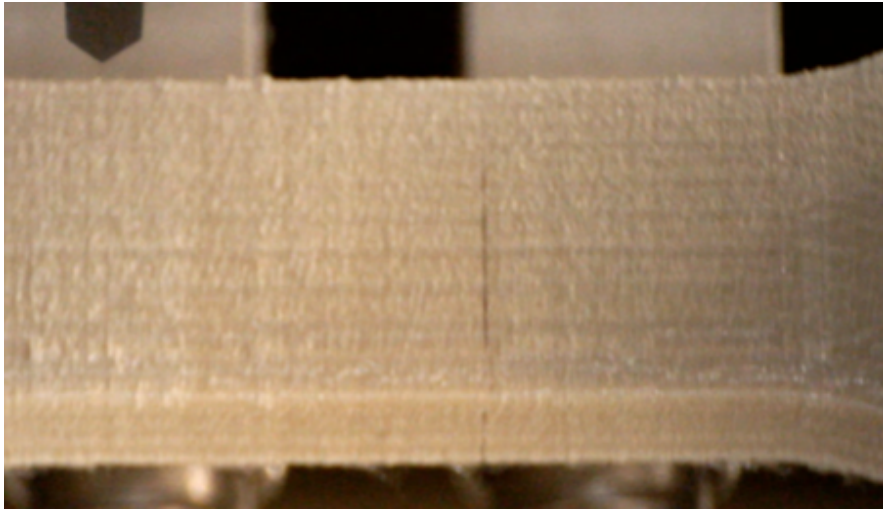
Example of fracture in a V specimen (reference) tested with the Zwick setup.
